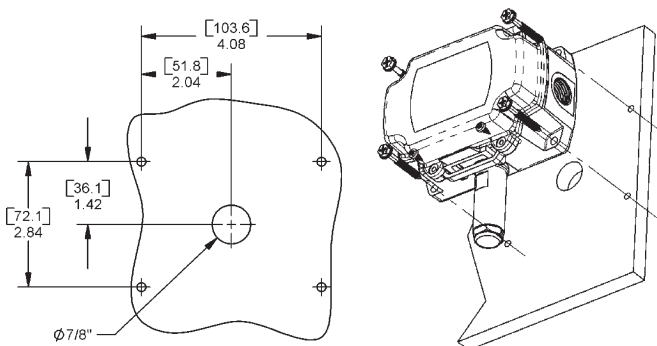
The BAPI-Box enclosure and mounting hole dimensions.
